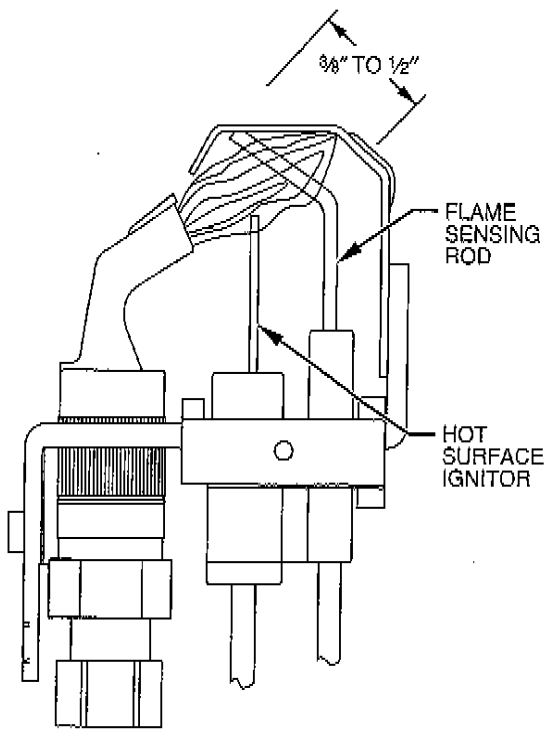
Position of Pilot to Hot Surface Ignitor and Flame Sensing Rod
